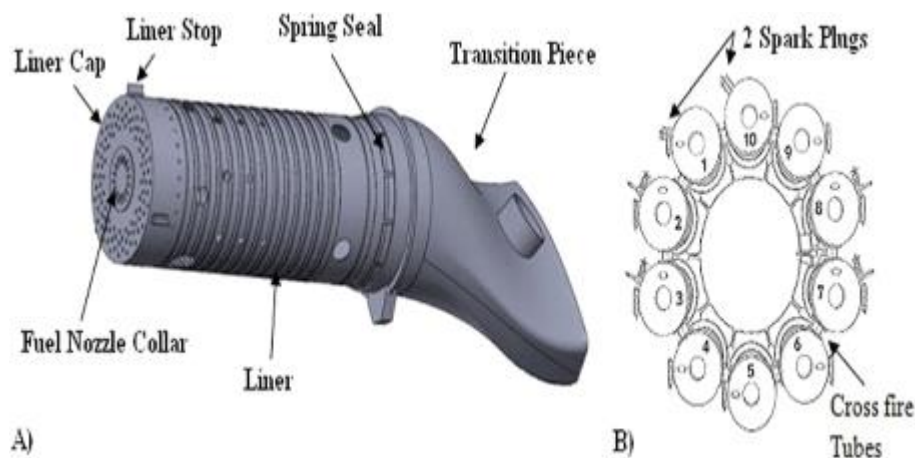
(a) Schematic of the combustion chamber; (b) arrangement of the chambers on the rotor
